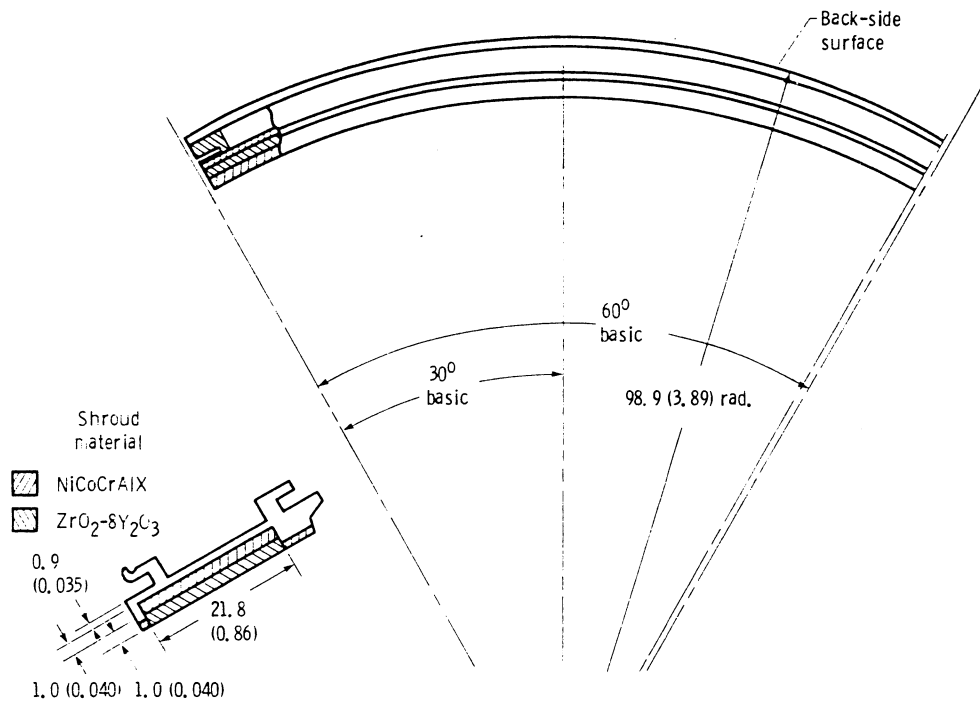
Shroud general geometric parameters. (Dimensions are in millimeters (inches).)
